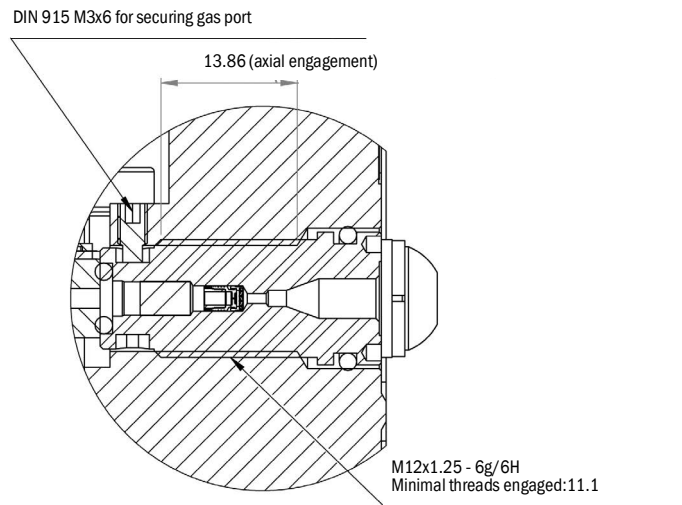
Threaded flame path between Ex gas ports and Ex enclosure body
